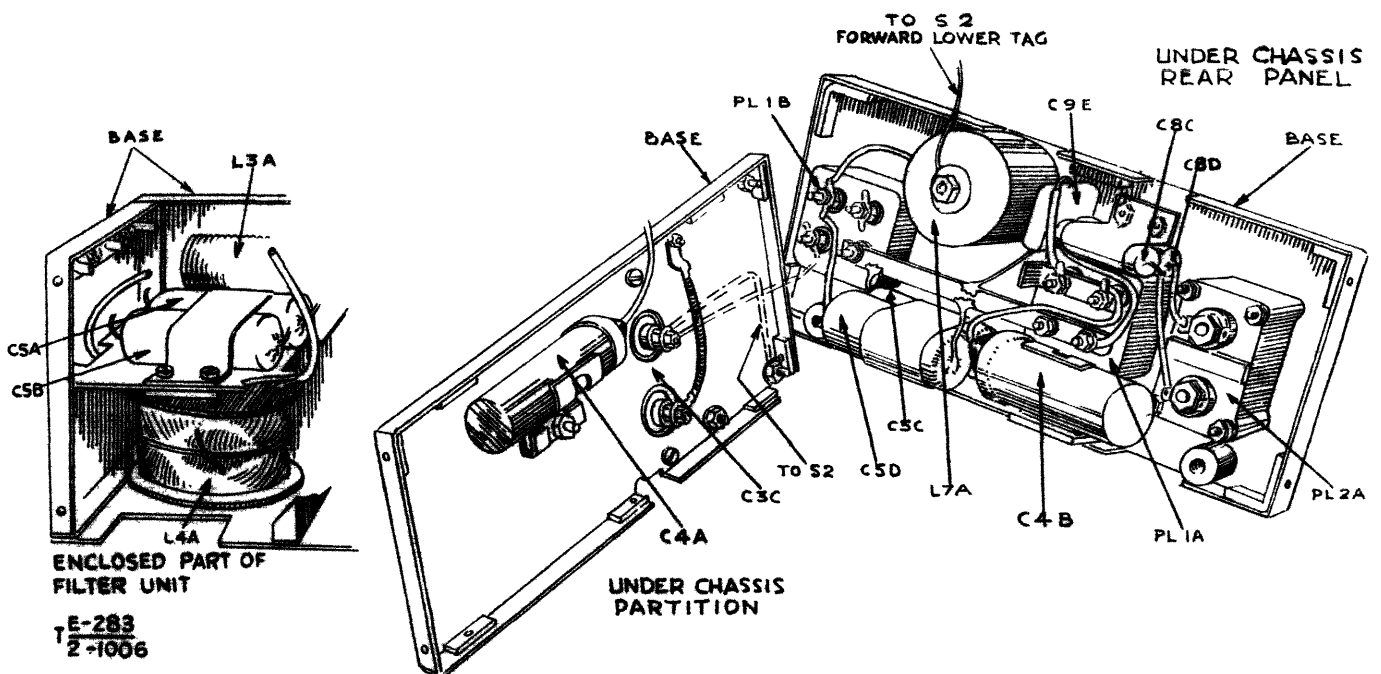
Power supply unit No. 15, under chassis sub-assemblies
